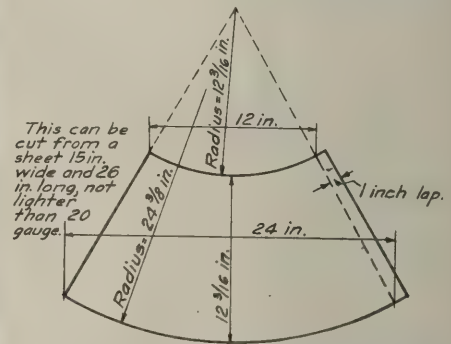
Slump test molds are inexpensive and can be made by any tinsmith, using this plan
